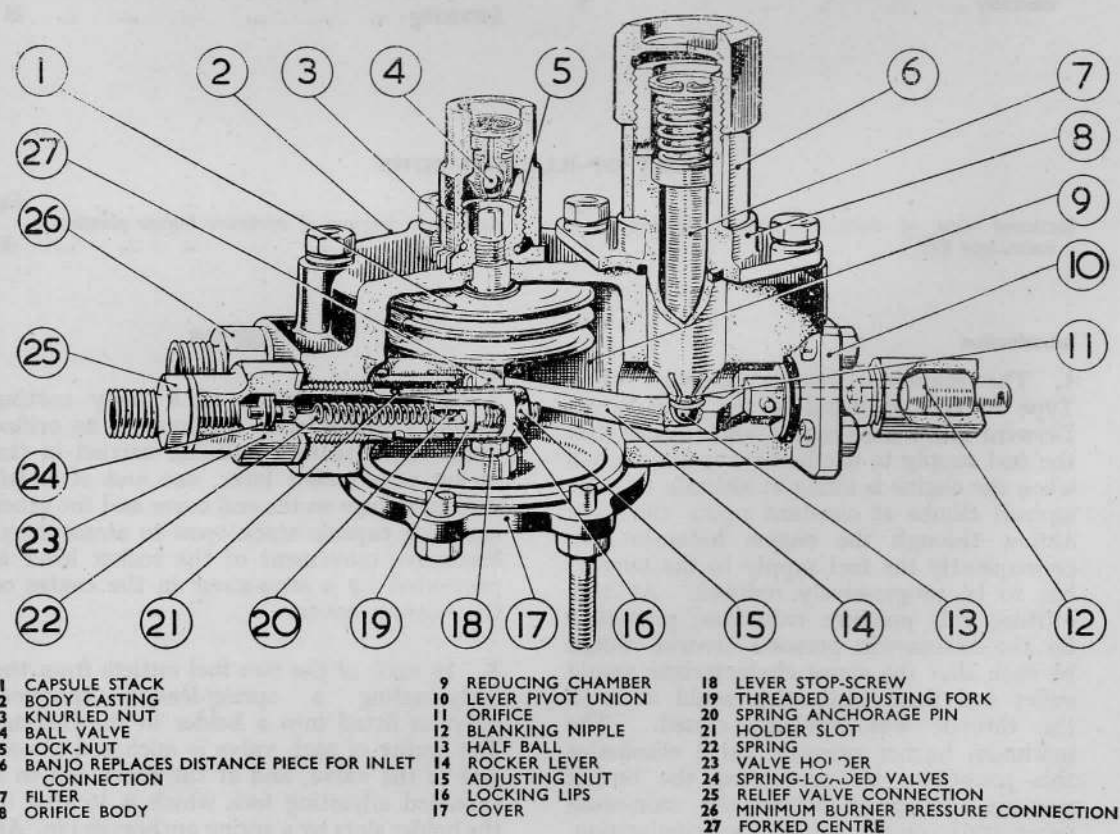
Sectioned view of minimum burner pressure valve, type RV1
